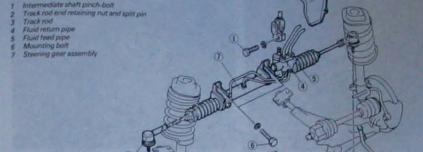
Power steering gear assembly - left-hand drive shown, right-hand drive similar (Sec 21)
